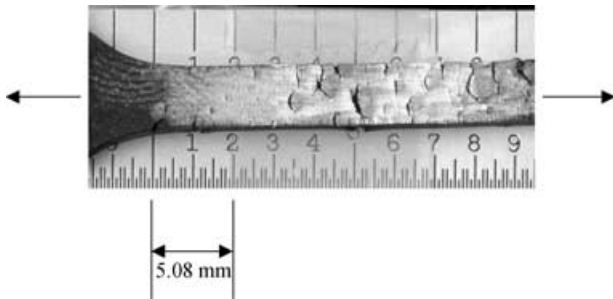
Surface cracking in a failed simple tension fatigue specimen.
